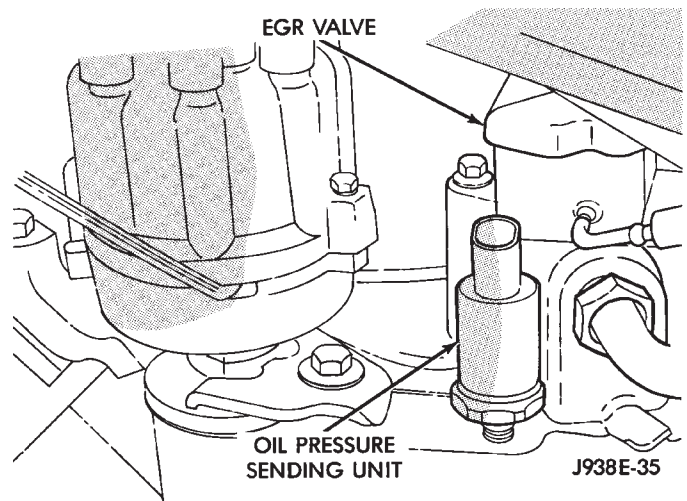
Oil Pressure Sending Unit - 5.2L Engine
